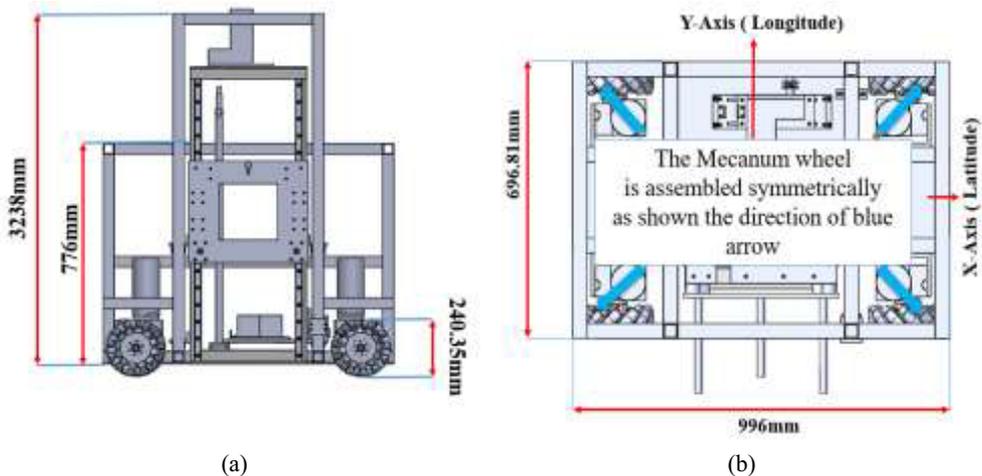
The dimension of MHeLFAGV base. (a) Side view; (b) Top view.
